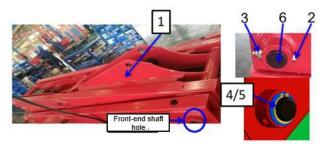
Installation of third layer fork 1. Third inner arm assembly 2. Bolt 3. Nut 4.
